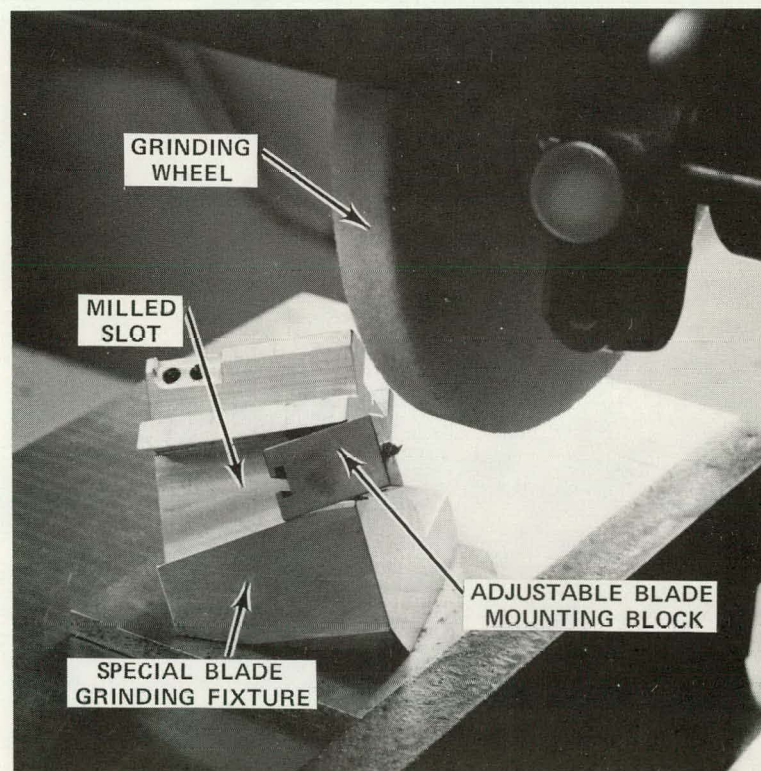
The blade mounting blocks are clamped to a special fixture for rapid grinding of each blade surface.
